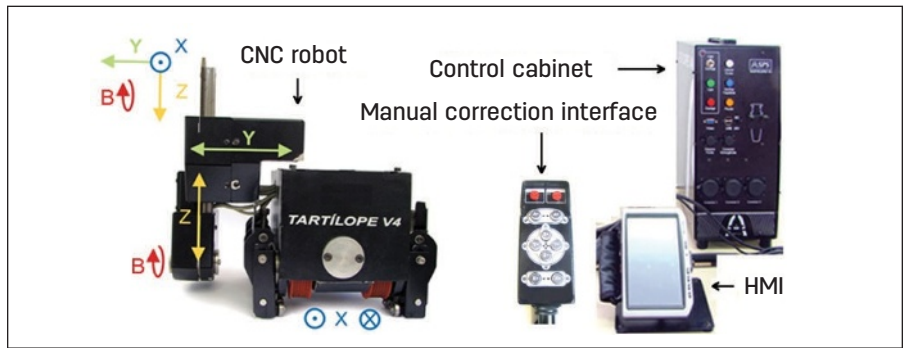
CNC Cartesian robot dedicated to welding (Ref. 11).
